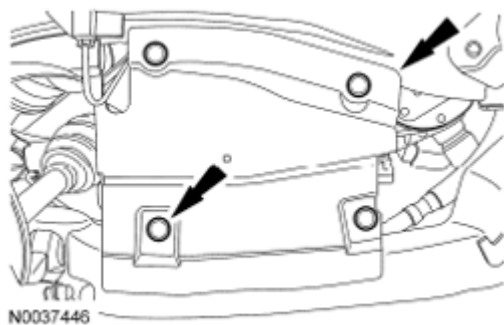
Locating RH Splash Shield & Pin-Type Retainers
